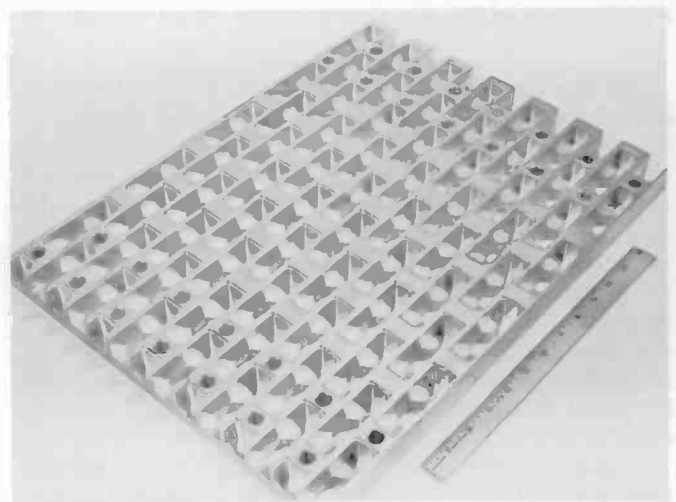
is a segment of a planar-array aperture, fabricated as part of an IR&D project on a numerically controlled milling machine. The radiating elements are waveguide horns formed into the front structural plate.
